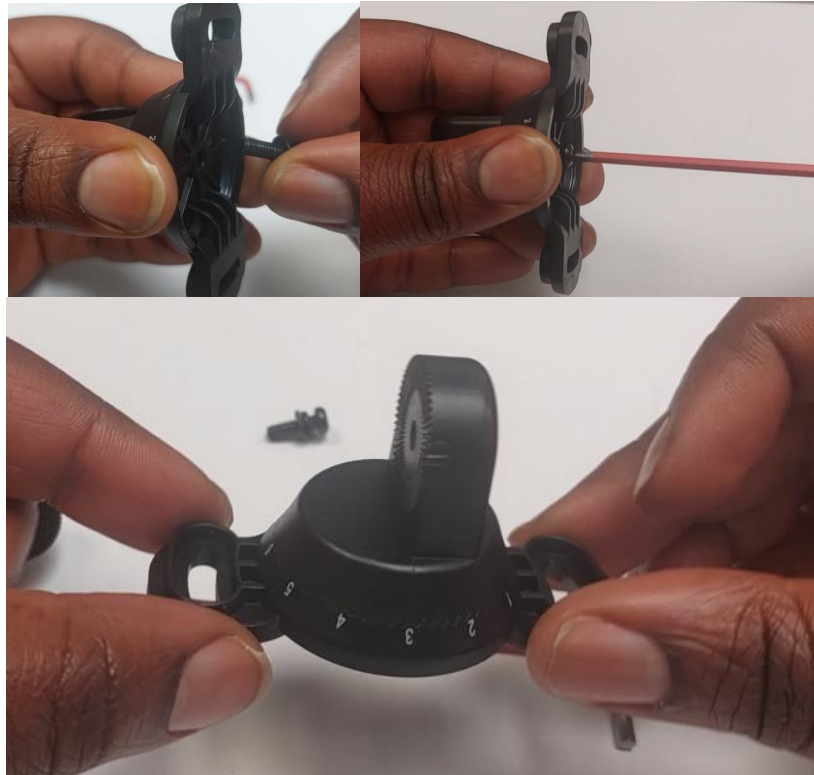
A-Pillar mounting bracket using the hex head screw and hex key to fix the two pieces together.
